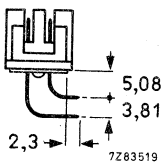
Male part with 90° angled dip-solder pins; dimensions are identical with those in Fig. 2, except as shown.
